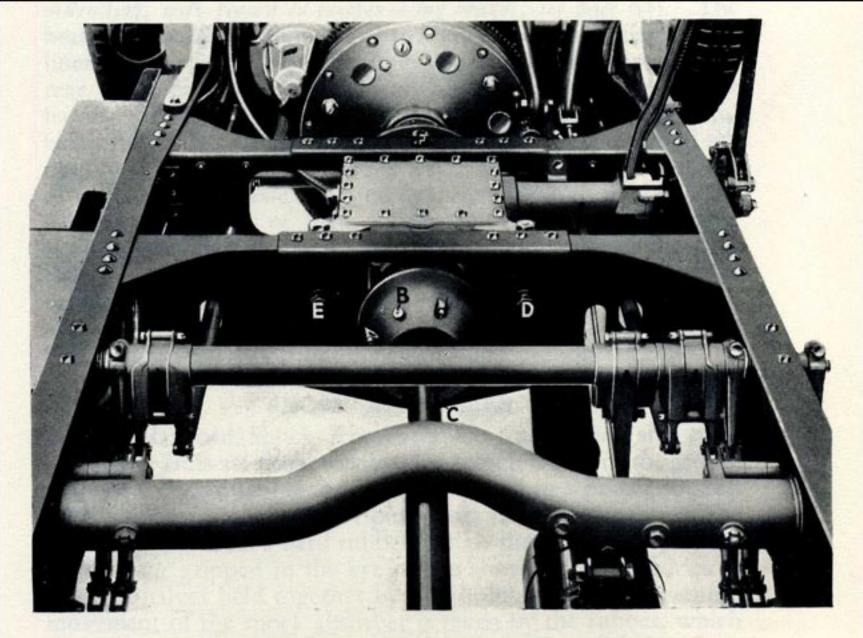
CENTRAL VIEW OF CHASSIS LOOKING FORWARDS. Four wheel brake compensating gear (A). Oiling nipple for front universal joint (B). Oiling nipple for charging propeller shaft (C). Gear box suspension bolts (D.E.F.)
